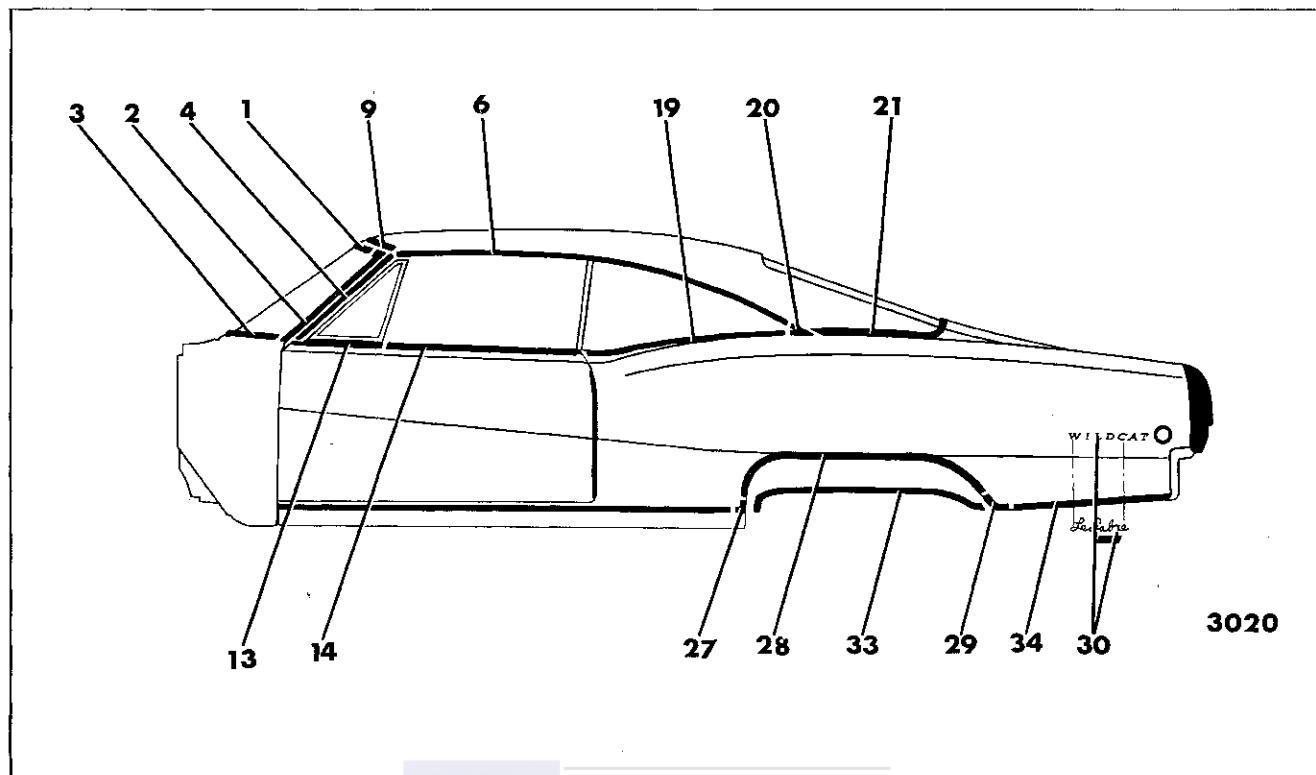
Buick "B-87" Styles ("67" Style Similar)
